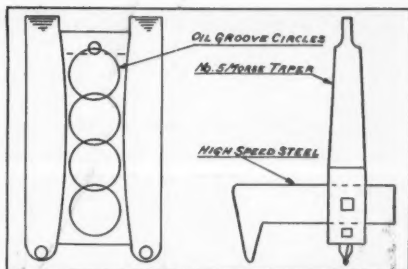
(Left) Drawing showing how oil-grooves are cut in shoe and wedge faces. (Right) Diagram of tool with which oil-grooves are cut.
